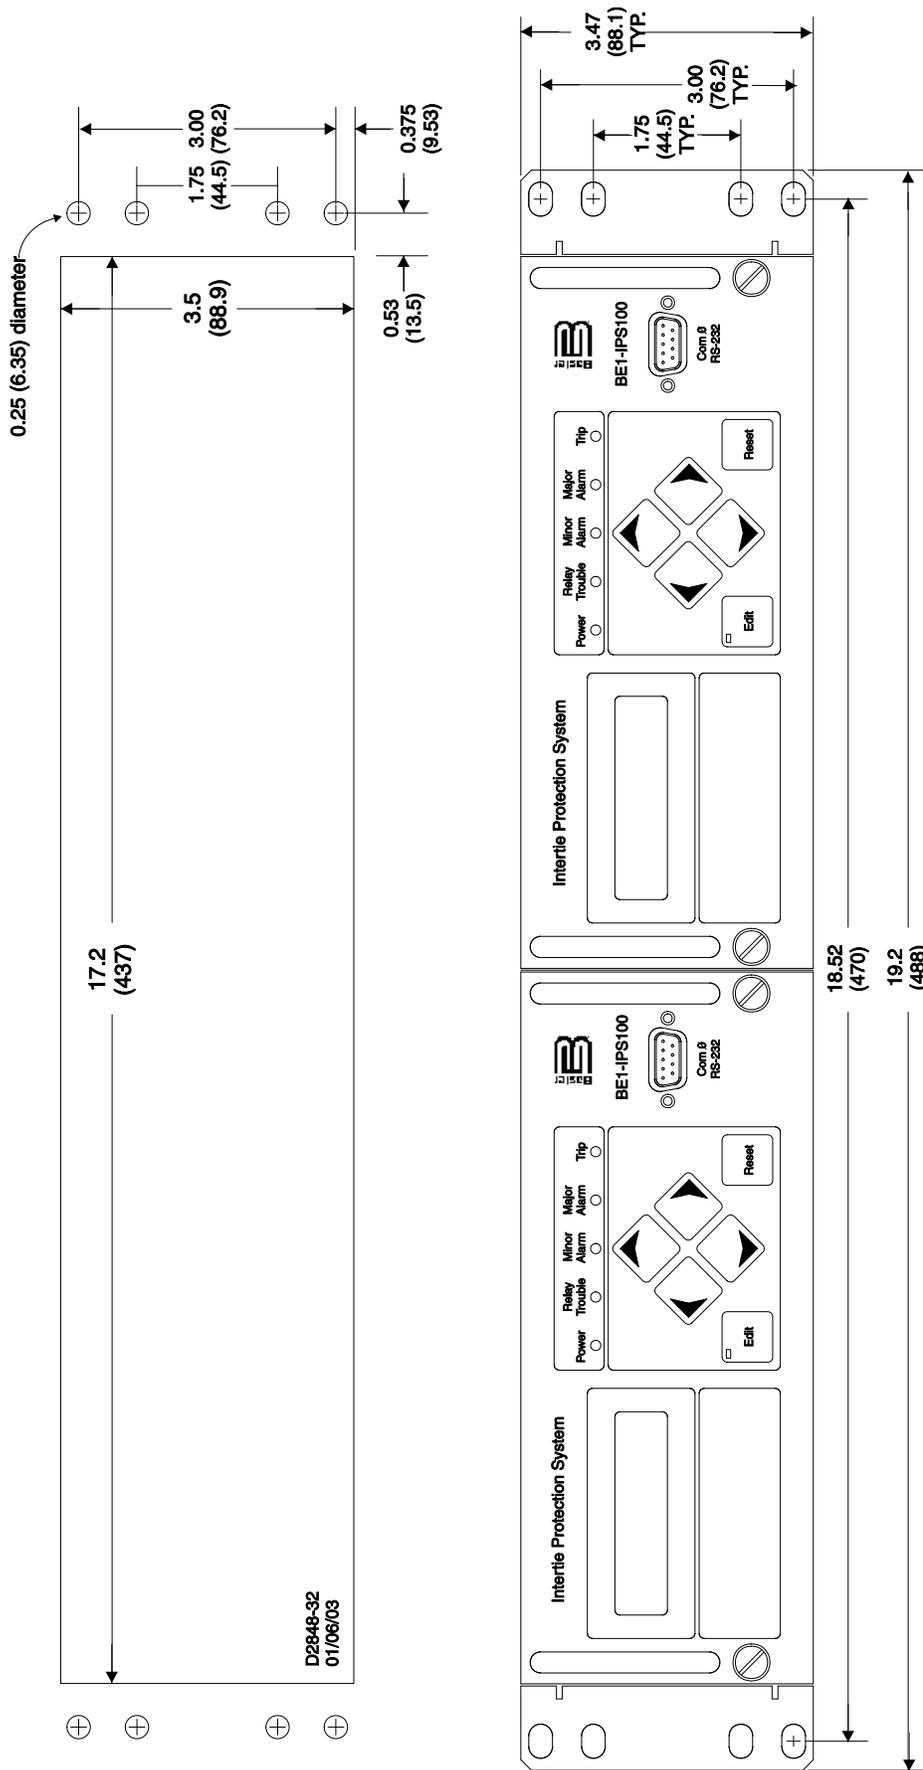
Mounting Dimensions for Panel Mounting Two H1 Relays without an Escutcheon Plate
